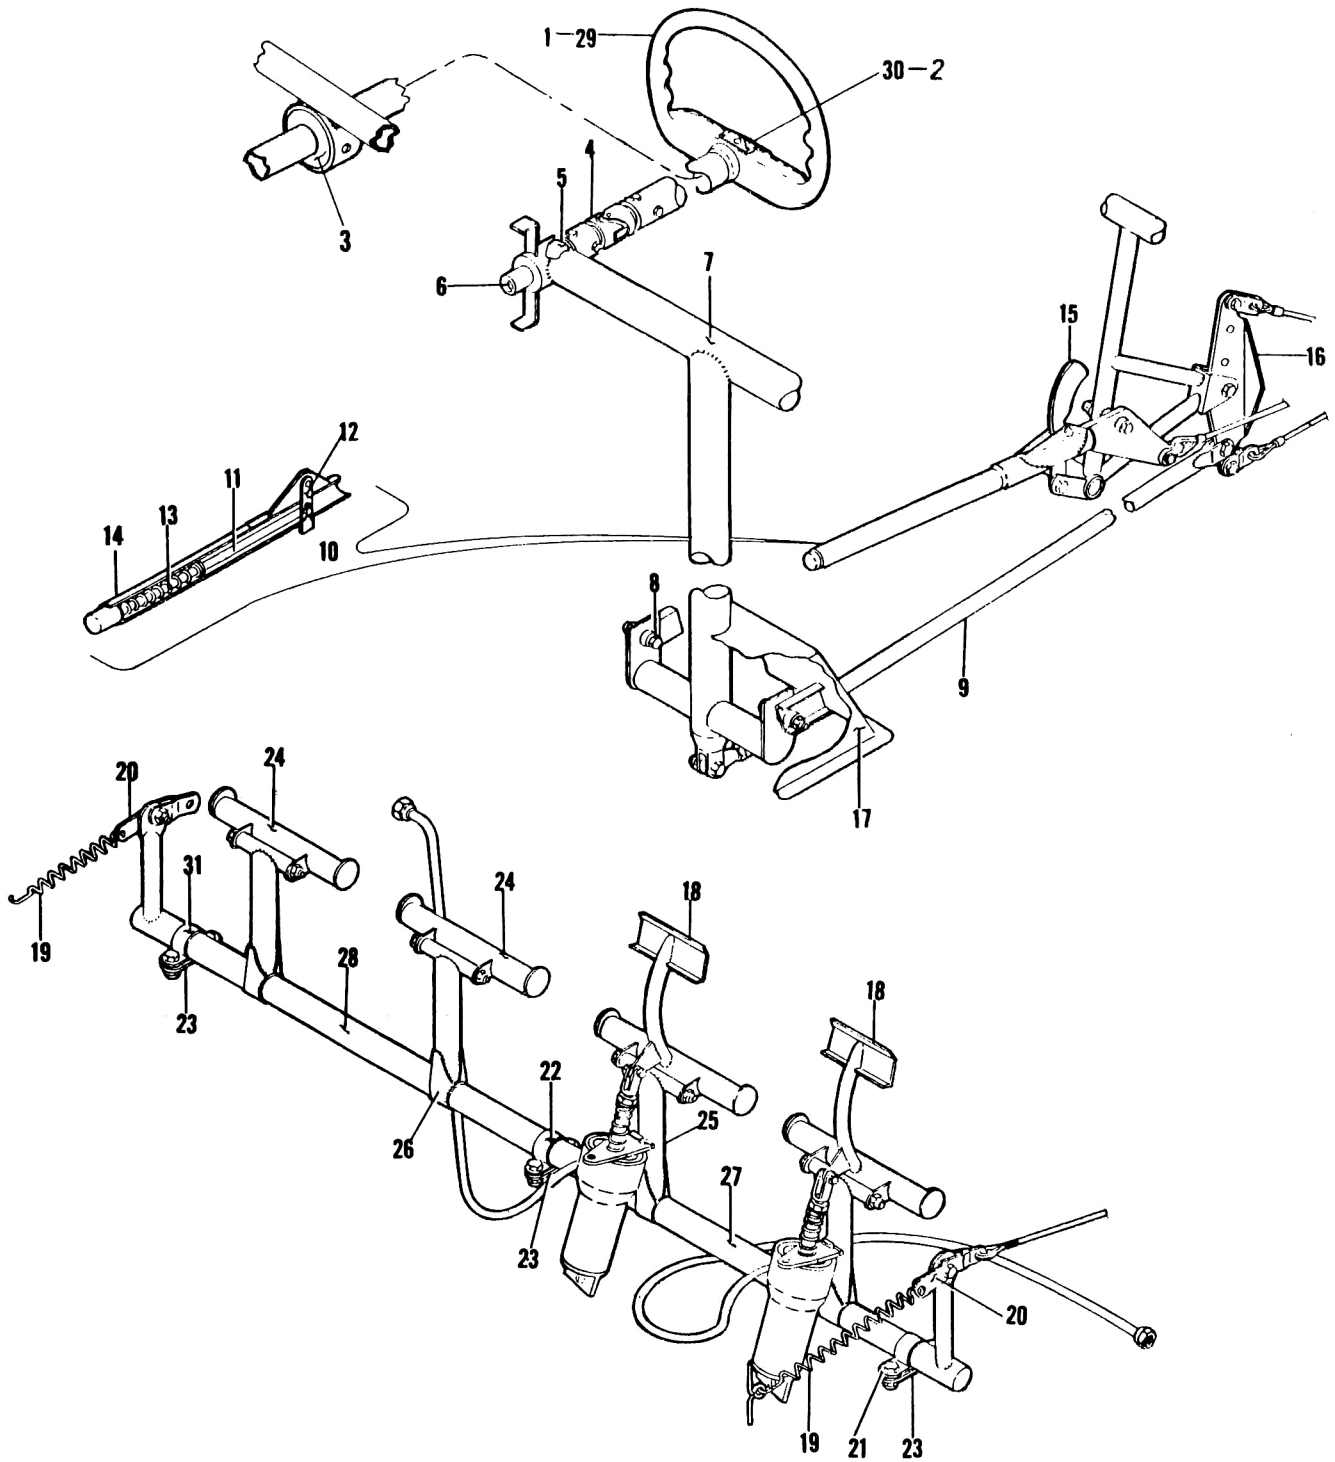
Sheet 2 of 2 sheets, Cockpit Finishing Installation
